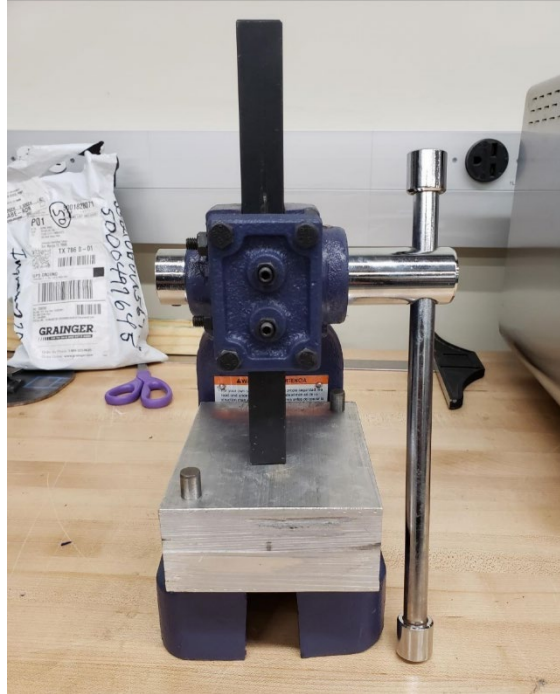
Press pushing mold pieces together to fuse melted HDPE into new product
